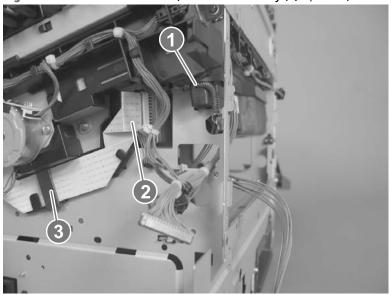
Remove the laser/scanner assembly (Y/M; 2 of 5)
